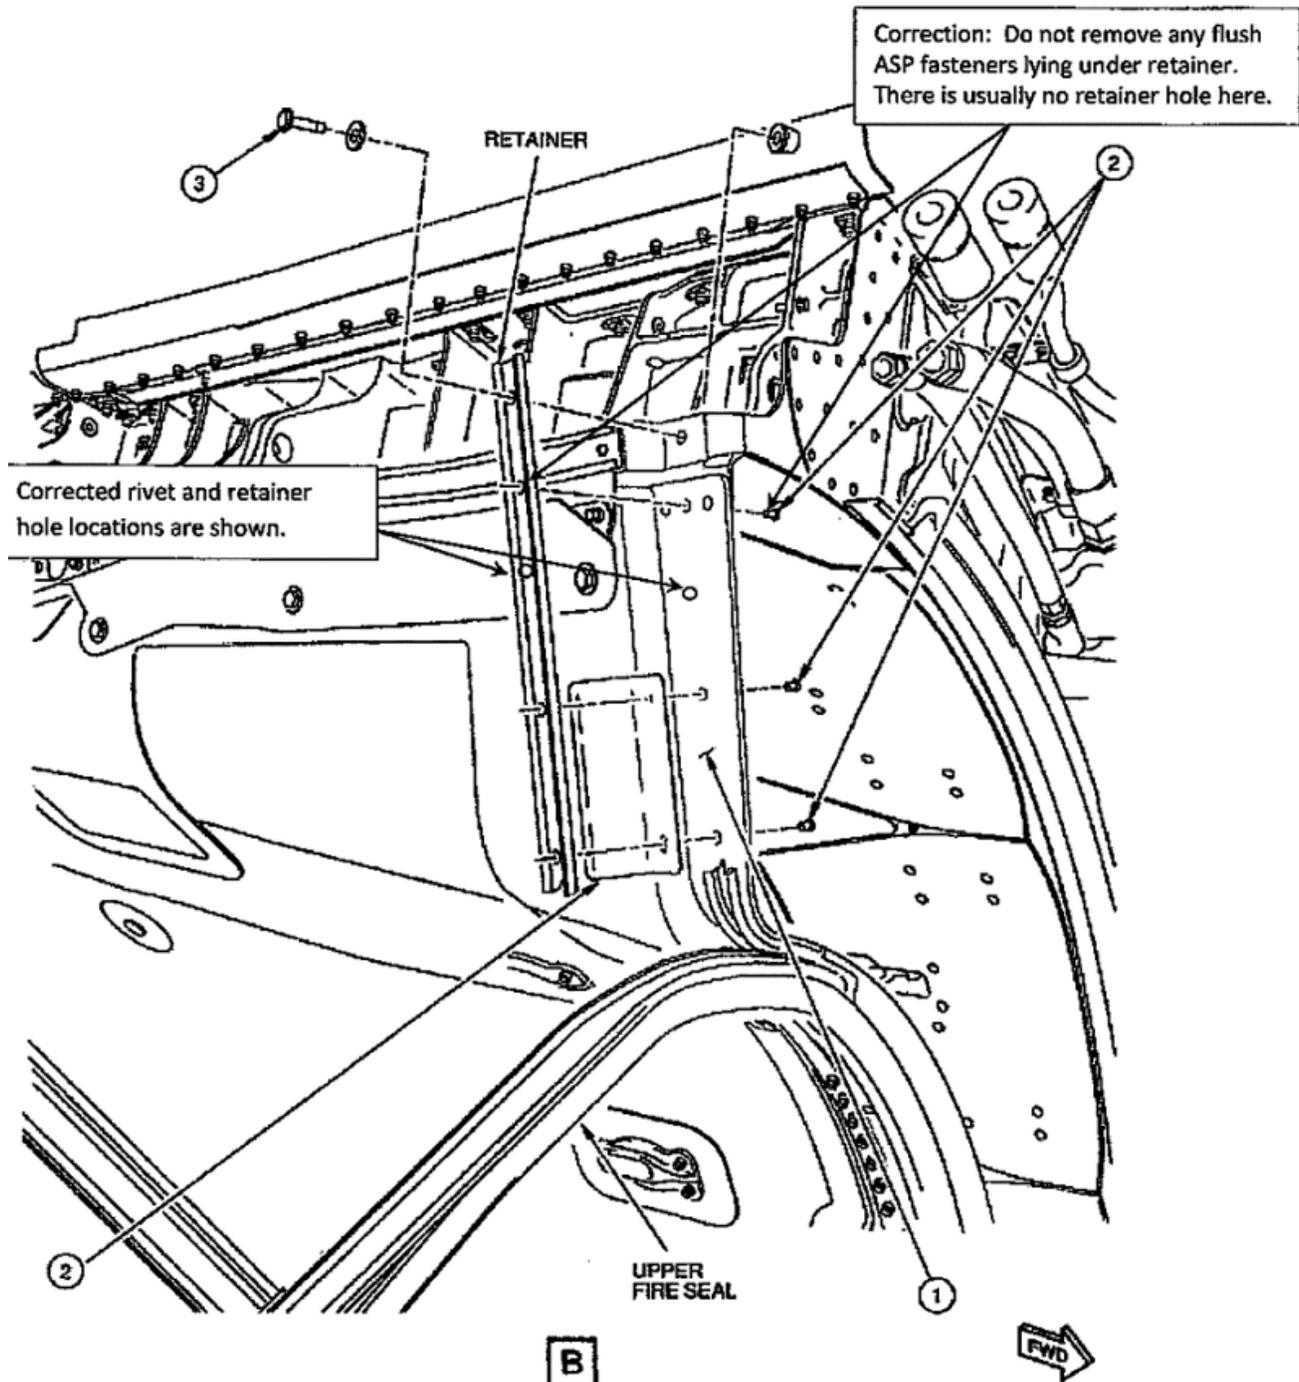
, Fastener Removal of the Retainer Support on the Right Thrust Reverser Half
